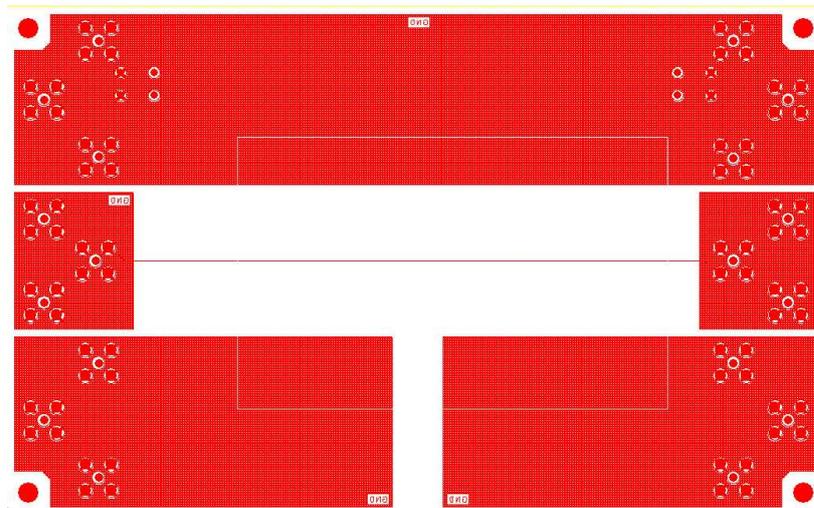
The Crosstalk Layout Issues Bare Board (Bottom View)
